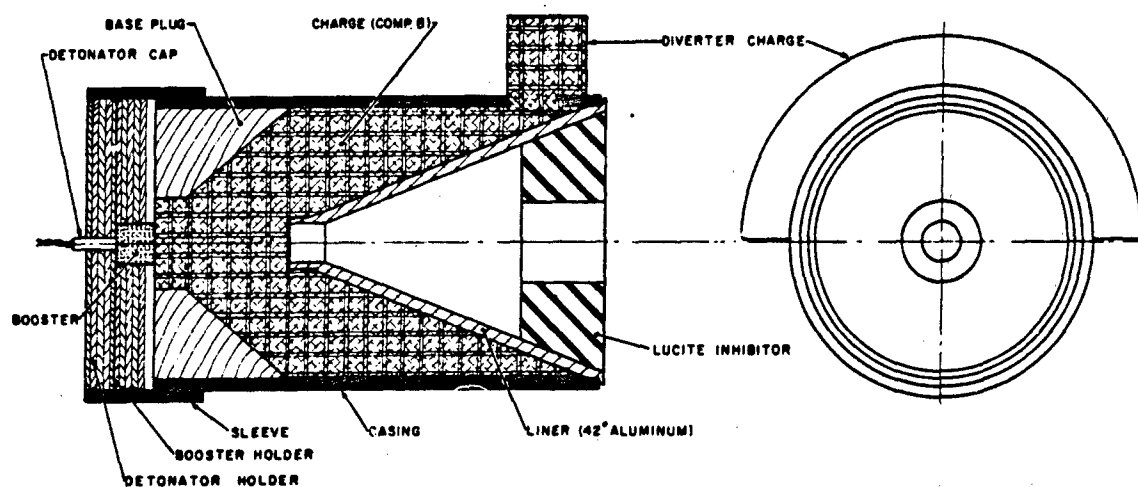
Scale 2 Inhibited Jet Shaped Charge Assembly.
